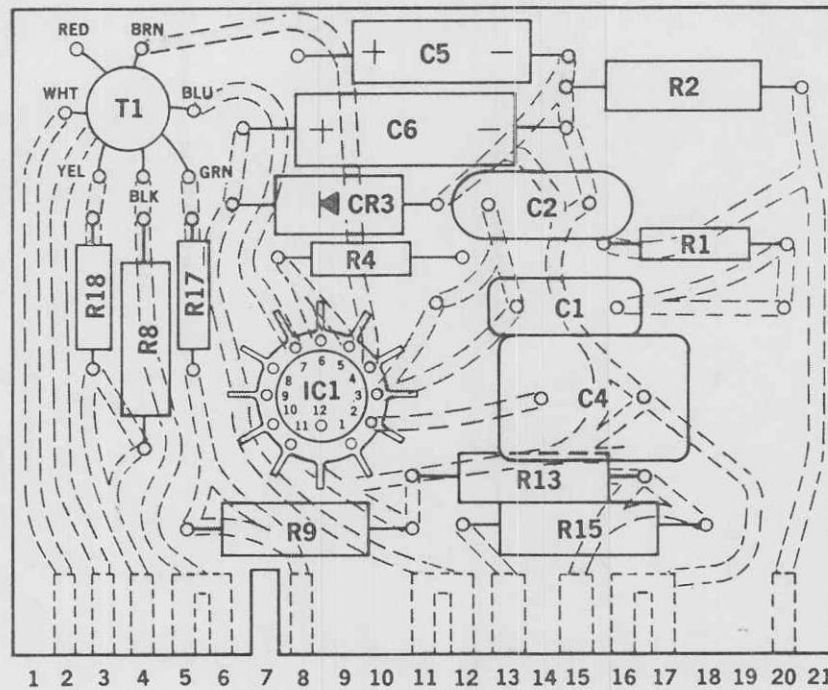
PRINTED CIRCUIT PARTS LOCATION
